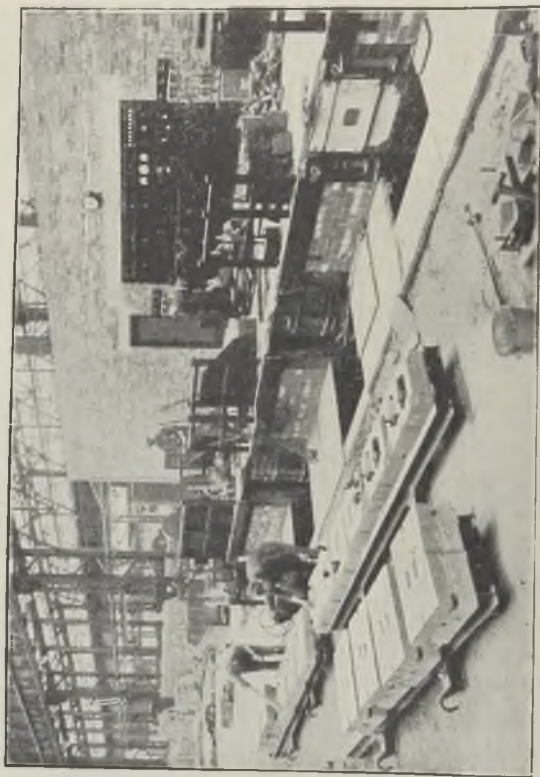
SETTING SMALL AND MEDIUM STEEL CASTINGS IN CASTING BAY.
